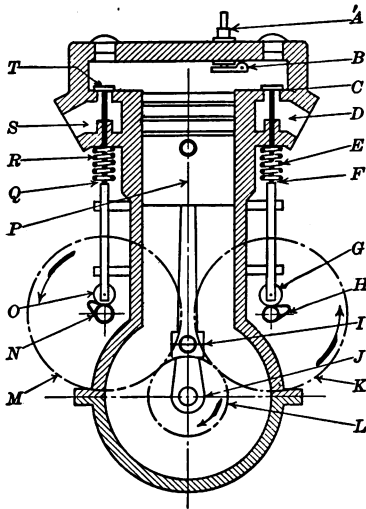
MECHANICAL DETAIL OF FOUR-STROKE ENGINE
